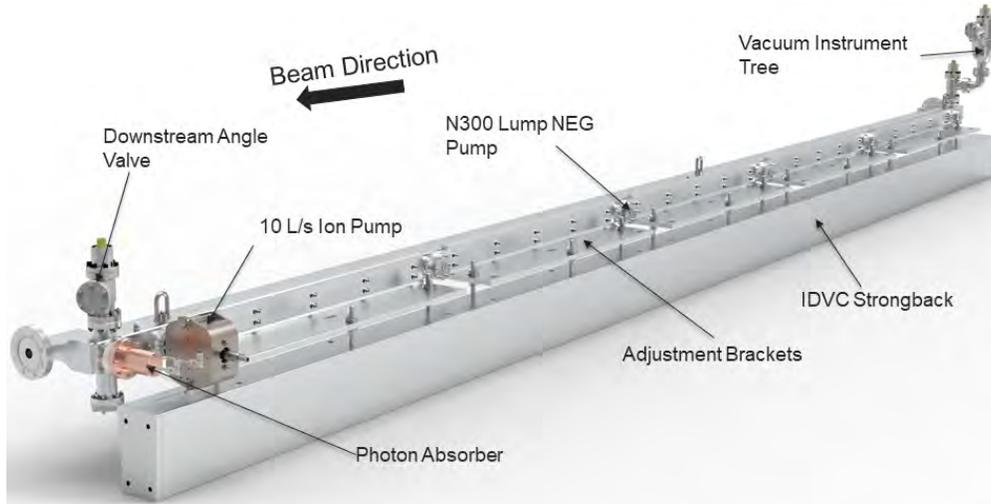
Planar Insertion Device Vacuum Chamber Assembly outboard view
